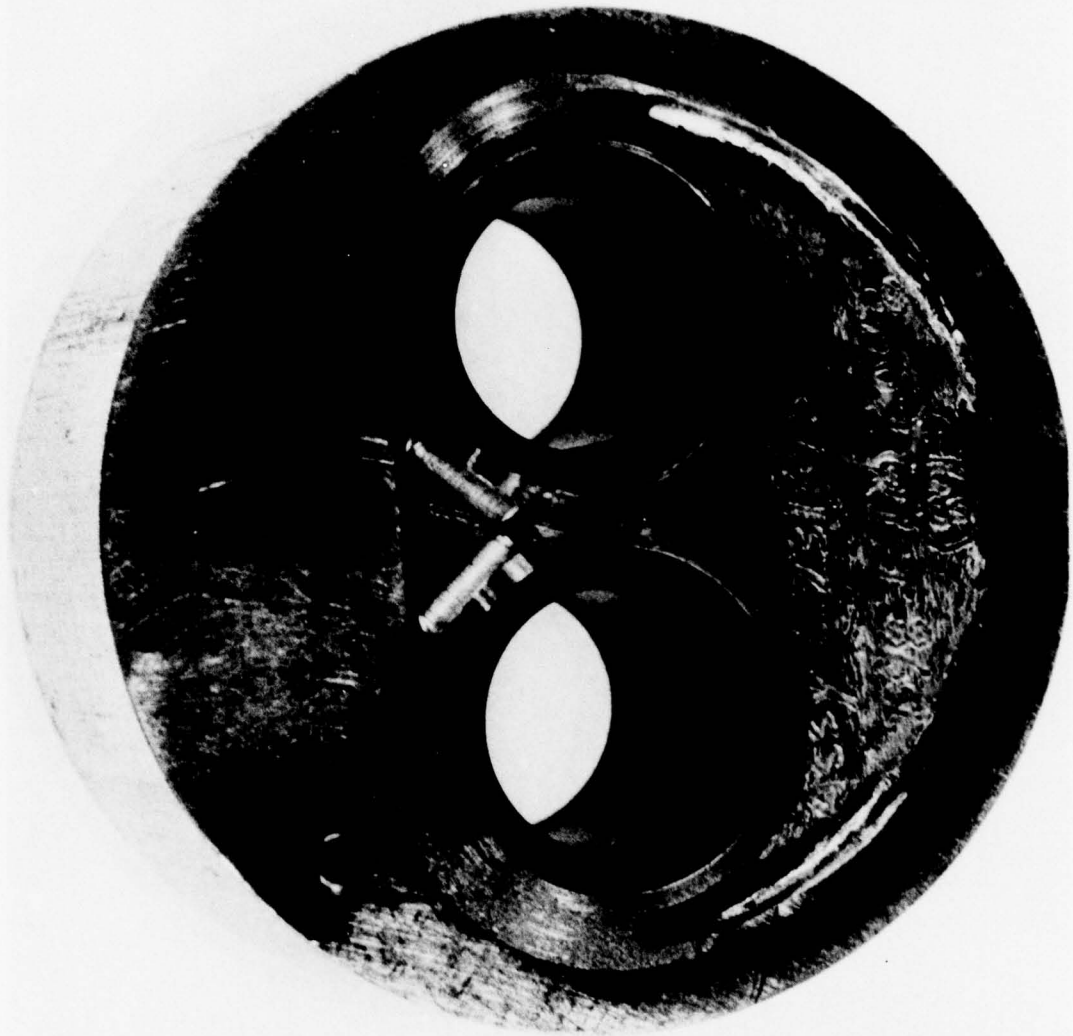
Supply Pump Front Bearing Assembly Package No. 1
